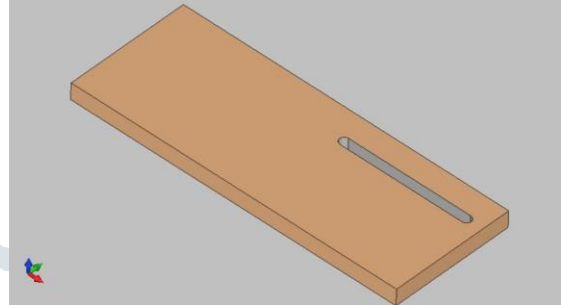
3D CATIA Model of Mini Lathe Machine Part
